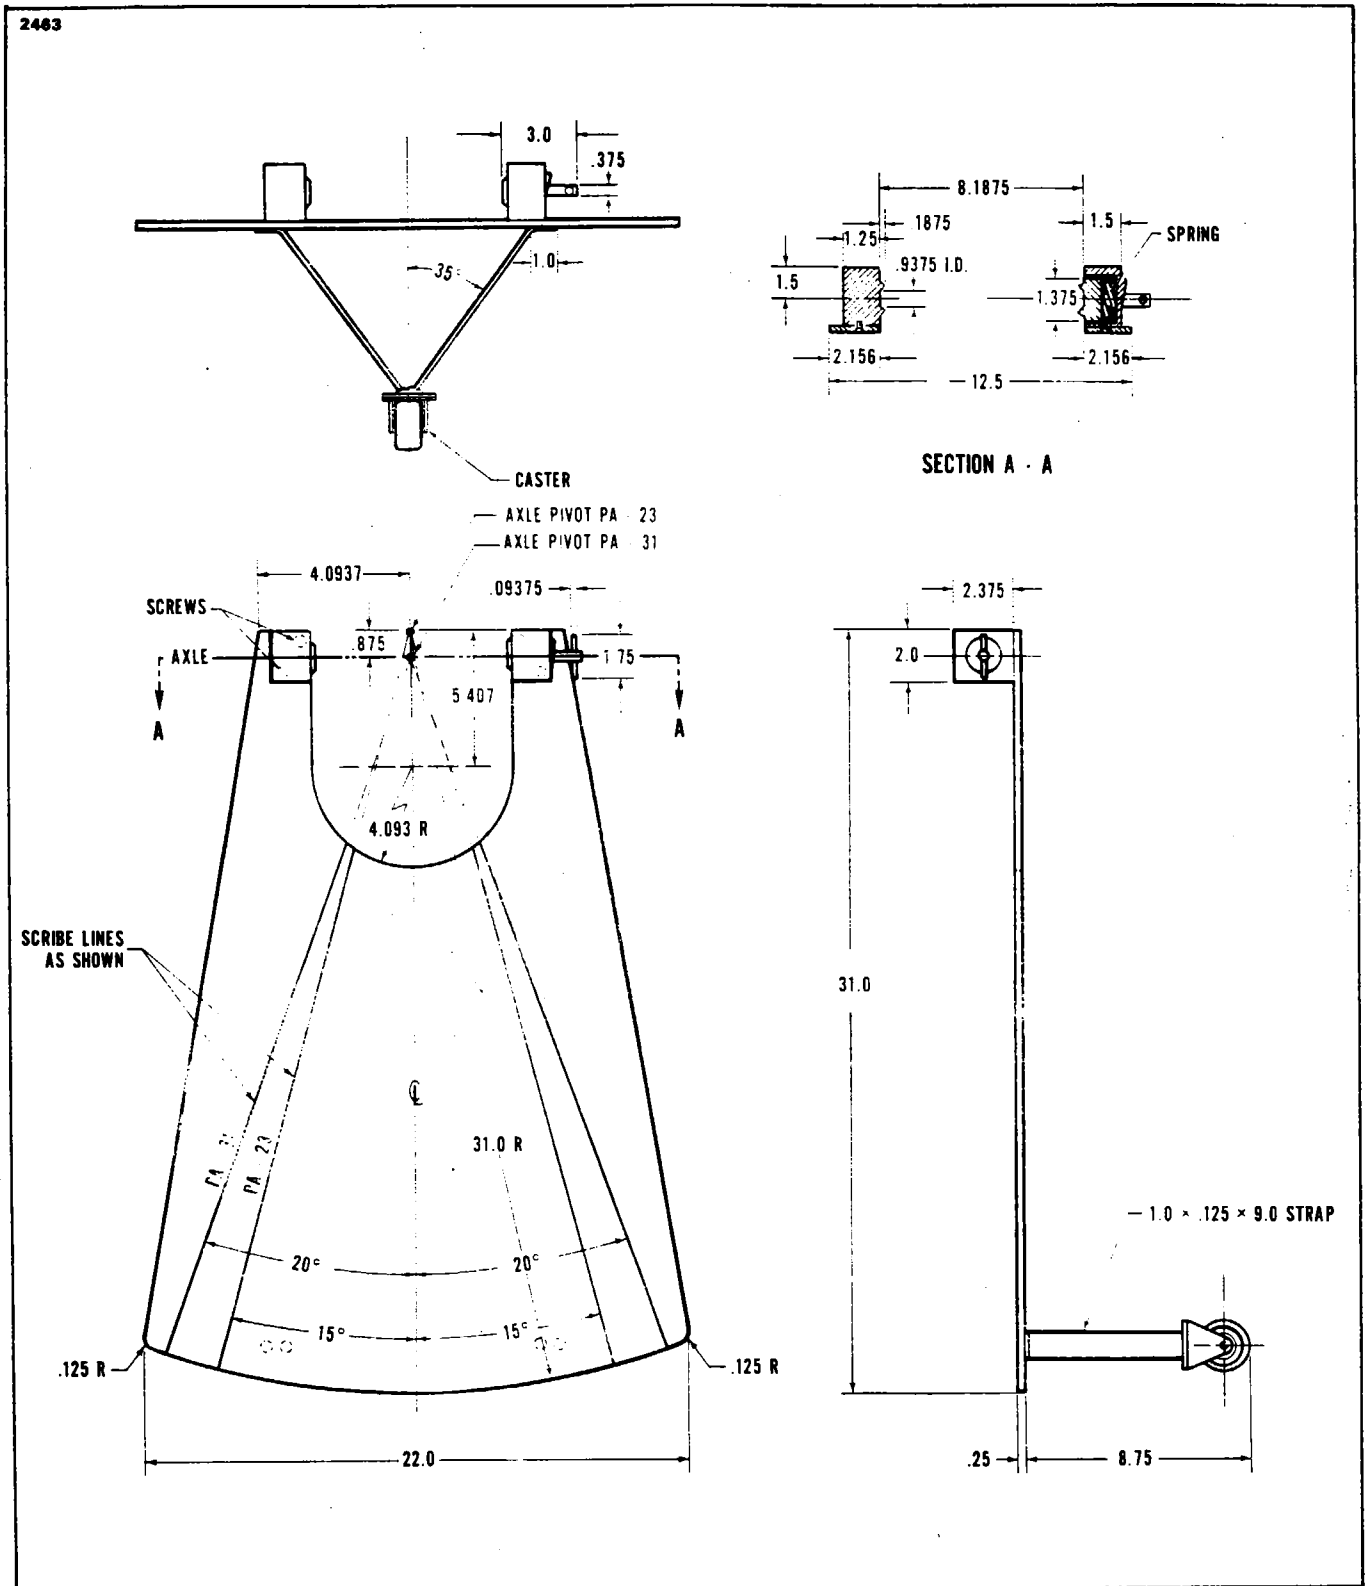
Fabricated Tool, Checking Nose Wheel Alignment
